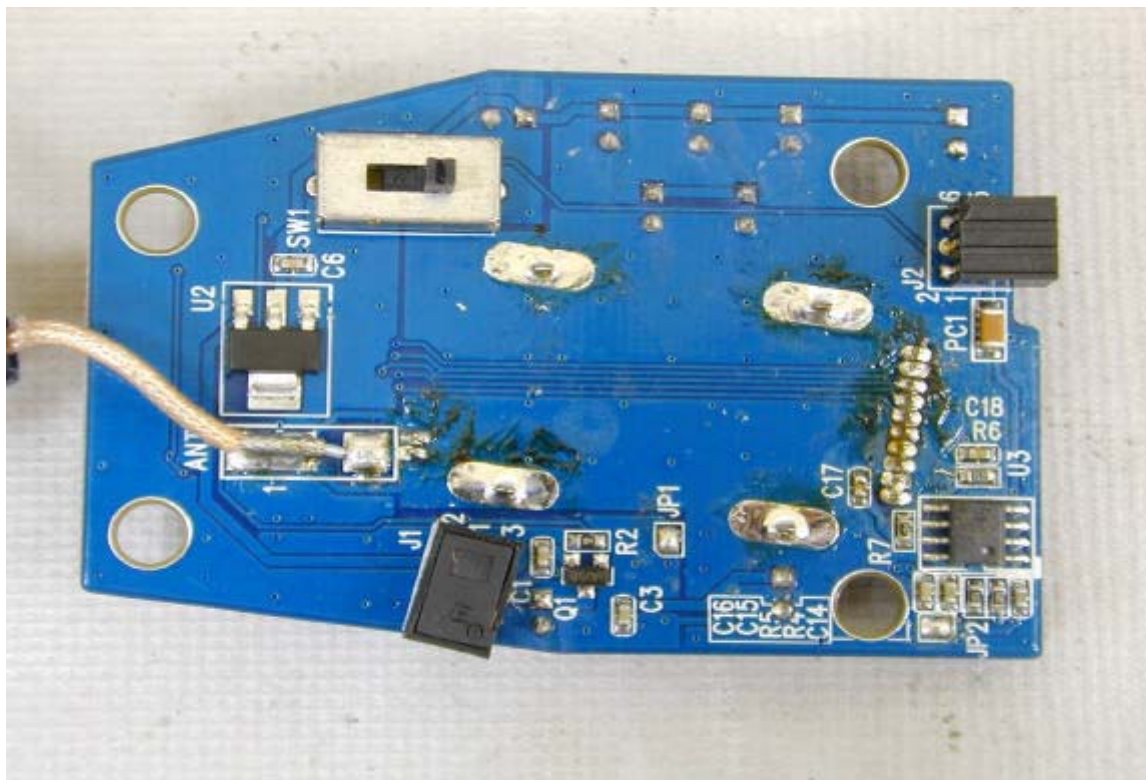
EUT (TX) COMPONENT SIDE VIEW
